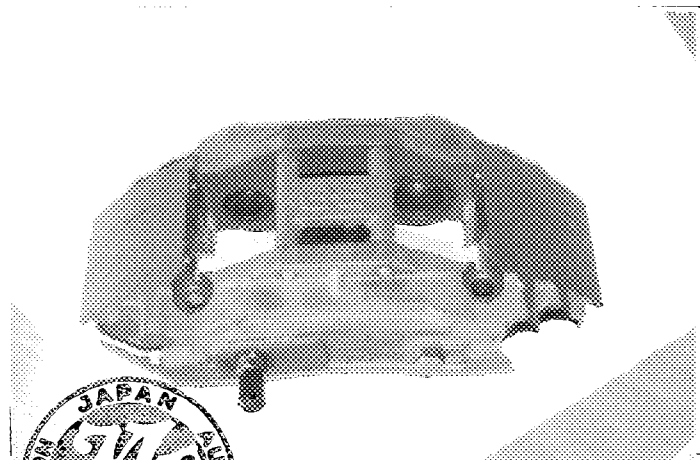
Front and/or Rear brake caliper, TYPE J (stone protection type)
